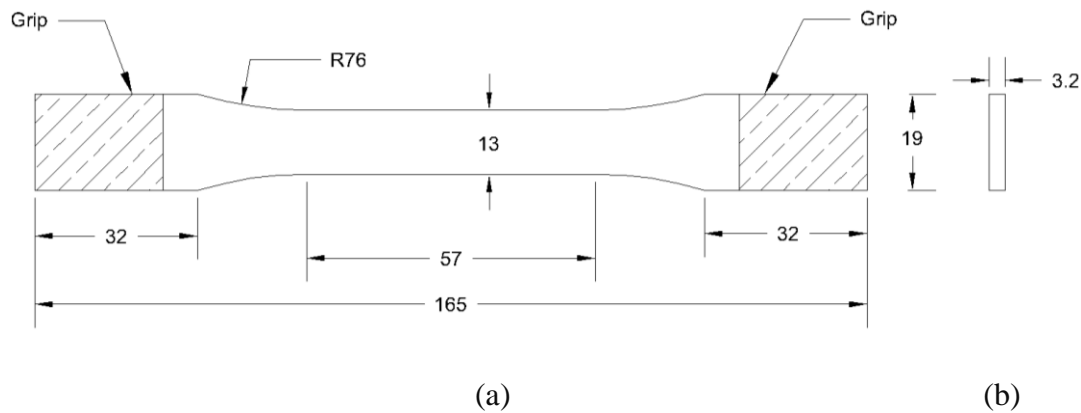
Geometry of adhesive tensile specimens (a) top view and (b) cross-section (All dimensions are in mm).
